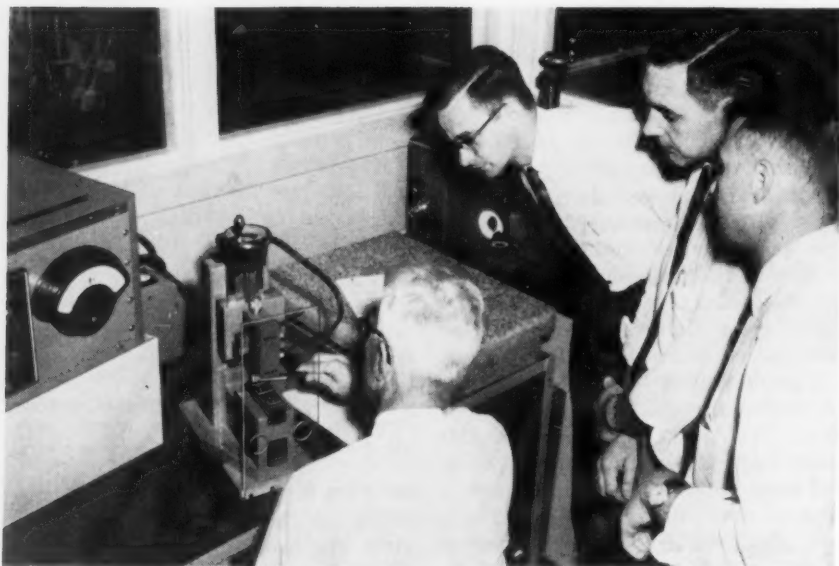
Personnel from industry receive practical coaching in the technique of close tolerance measurement at precision gaging workshop held by leading gage manufacturer.
